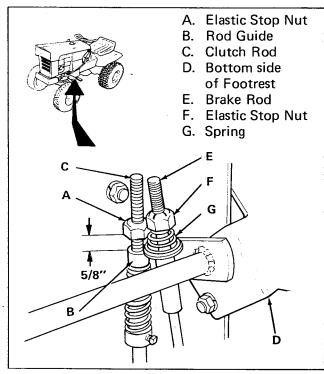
Brake Rod and Clutch Free-Travel Adjustments
